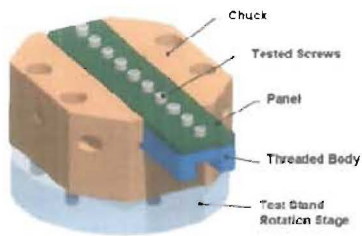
FASTENER TORQUE AND CLAMPING FORCE TEST APPARATUS
